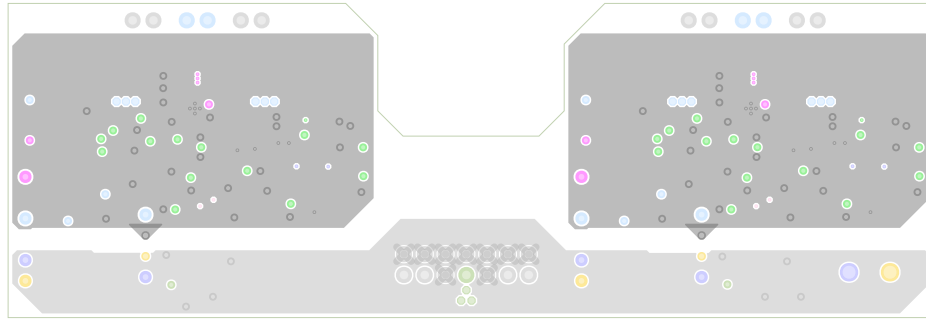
PCB design of the prototype Synchronous RB Switch gate driver, showing the second copper layer (layer 2 of 4).
